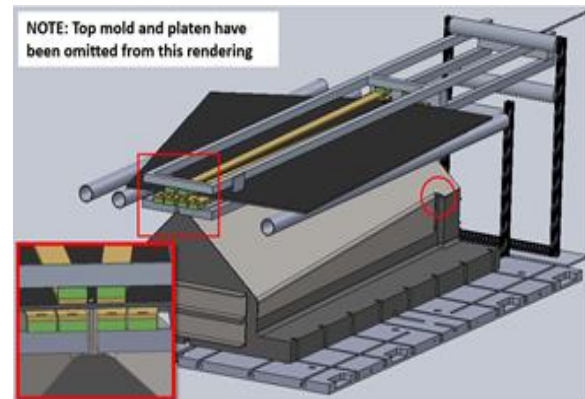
AM Mold laminate blank localized heater shuttle carriage.
